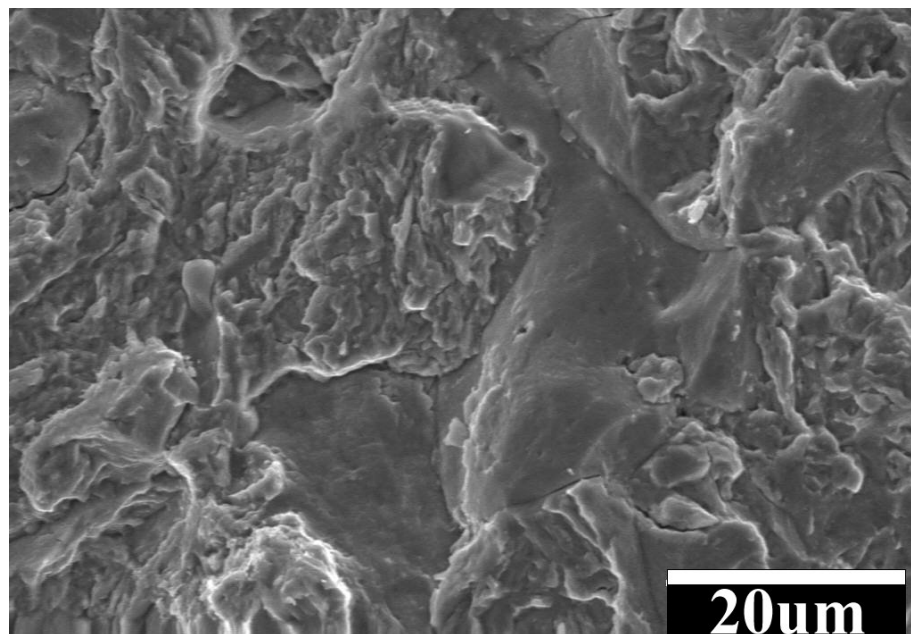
Microscopic View of the FCG Region on a Straight Cylinder Specimen Fracture Surface, $S_a = 196$ MPa (Specimen B7)
